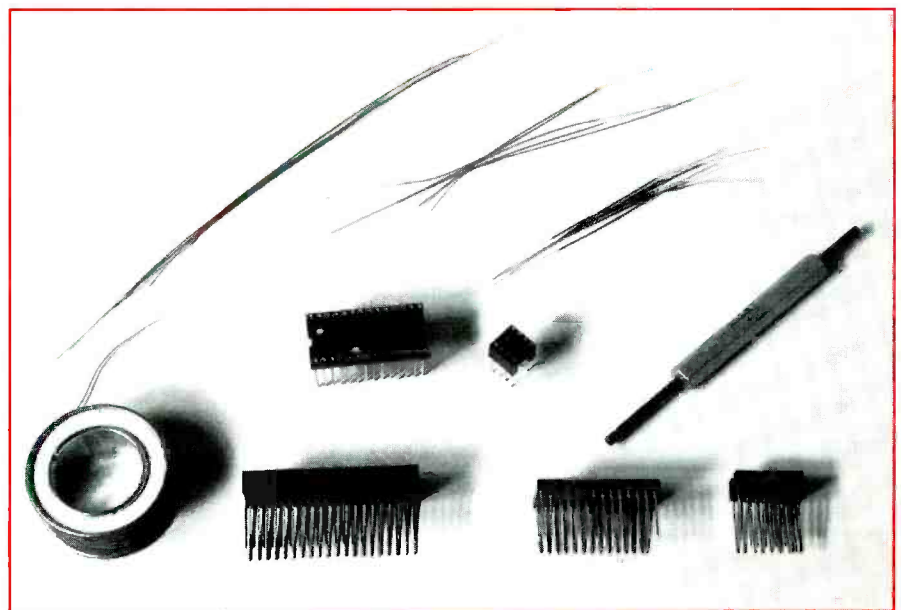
Wire Wrap materials. Clock wise from top: pre-cut wires, wrap/unwrap tool, sockets, and spool of wire.
